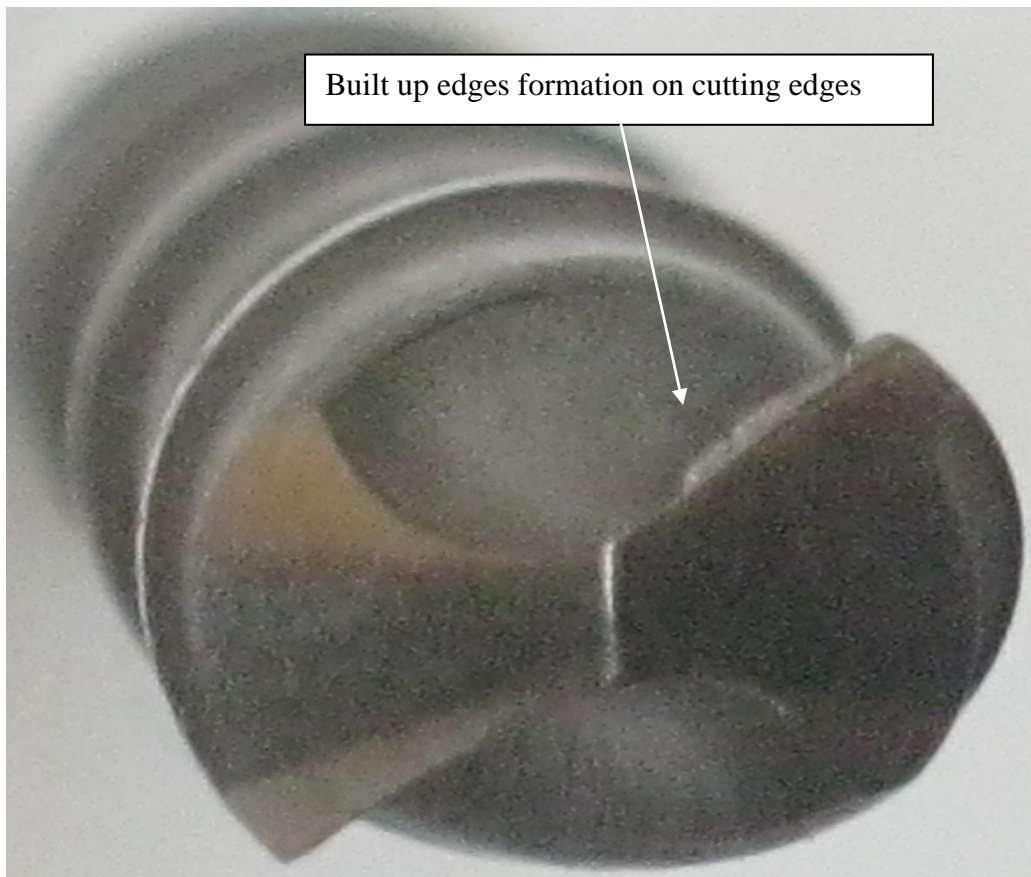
Wear of 12 mm M35 HSS drill after machining
